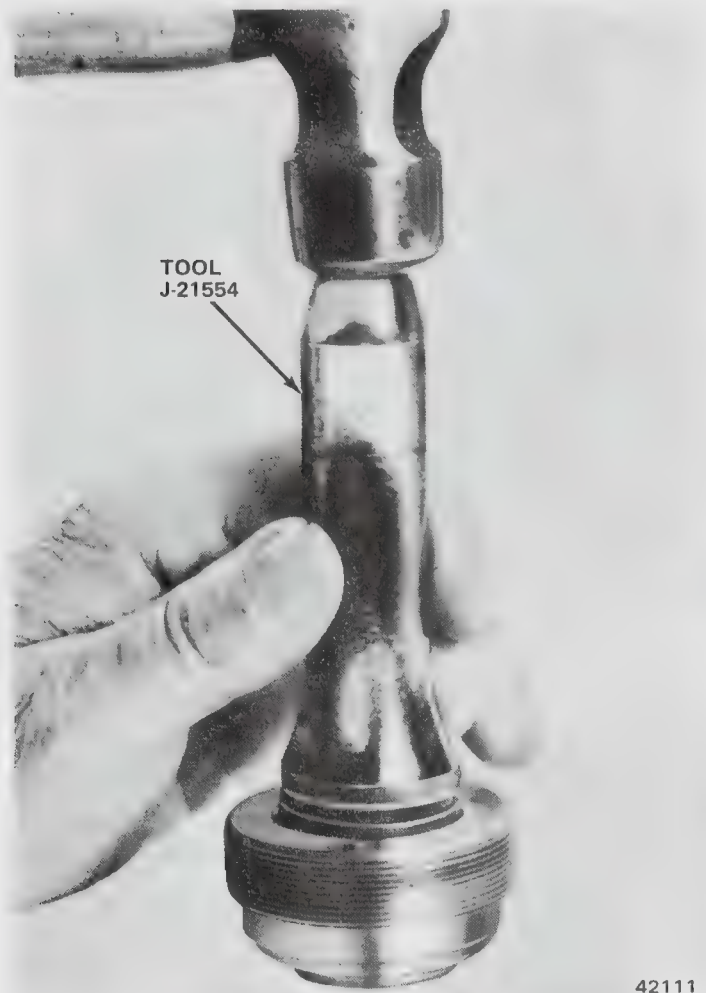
K-93 Adjuster Plug Oil Seal Installation
